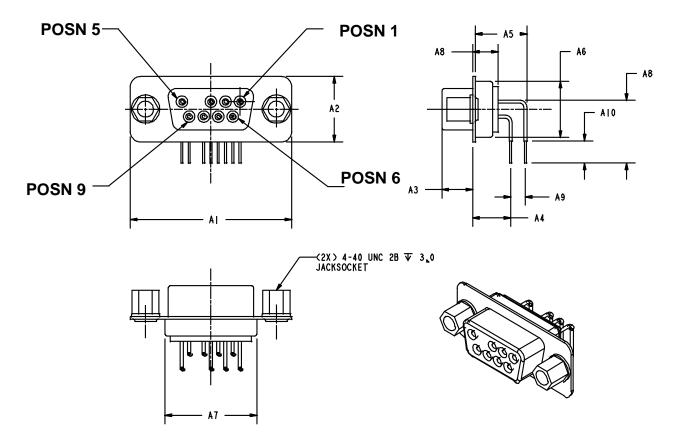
Fixed board right angle through hole (version 2) overview and outline dimensions
